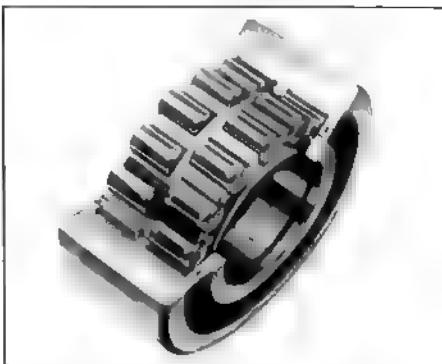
Cut-away of a double-row roller bearing. Photo courtesy Schaeffler UK.
